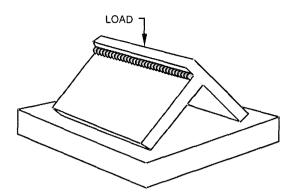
Method of Testing Fillet Weld Break Specimen
